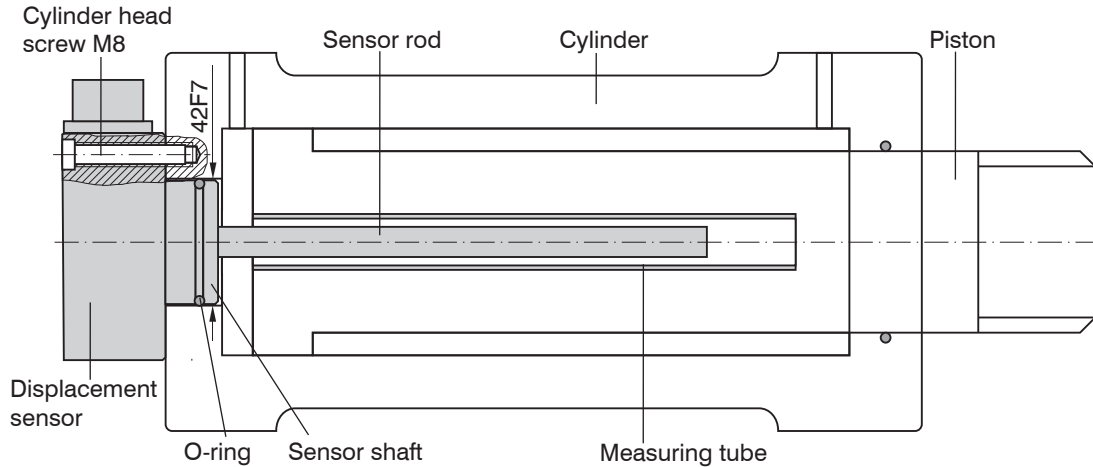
Sensor mounting in a hydraulic cylinder, EDS- ... -F model
